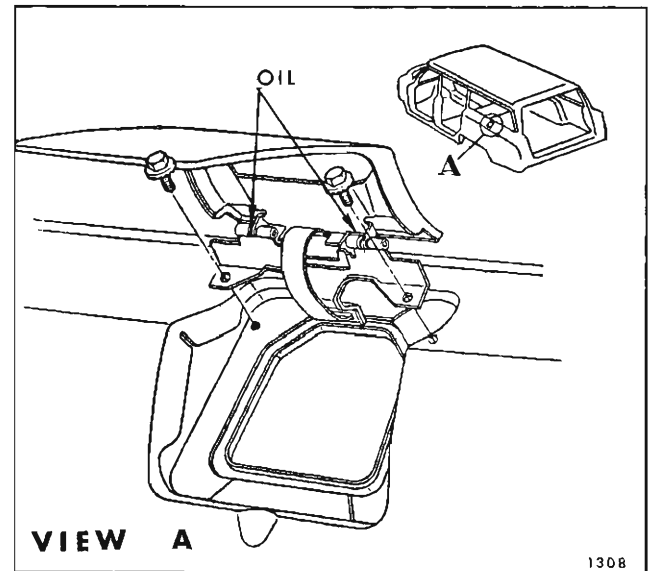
B8—Gas Tank Filler Door - Station Wagons
